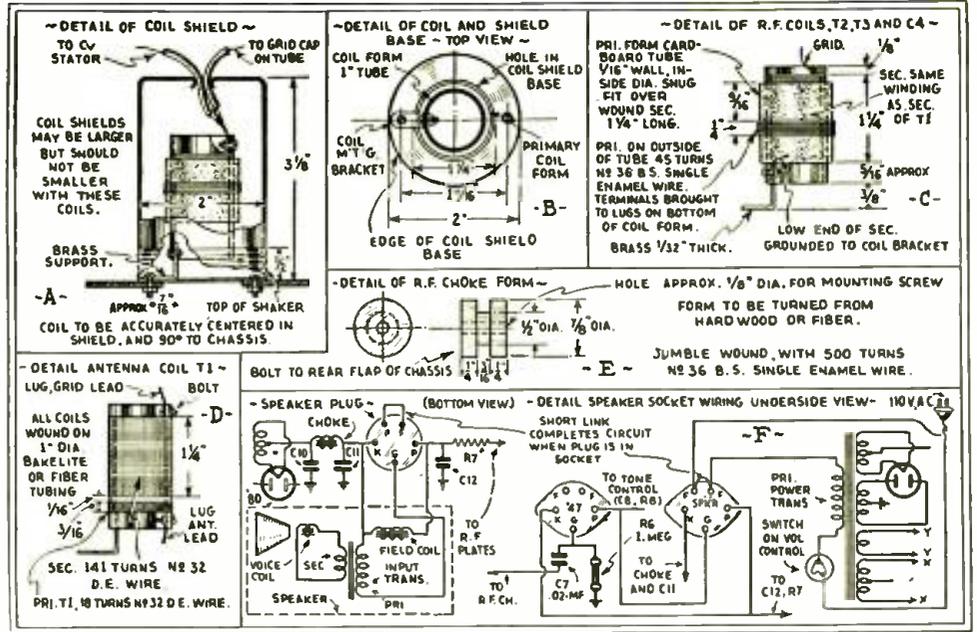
Detail sketches of the coils, chokes and speaker-socket wiring. Details of the coil mounting bracket are shown at A; of the shield at B; of the R.F. coils at C; of the antenna mounting bracket at D; of the R.F. chokes at E; of the speaker wiring at F.
